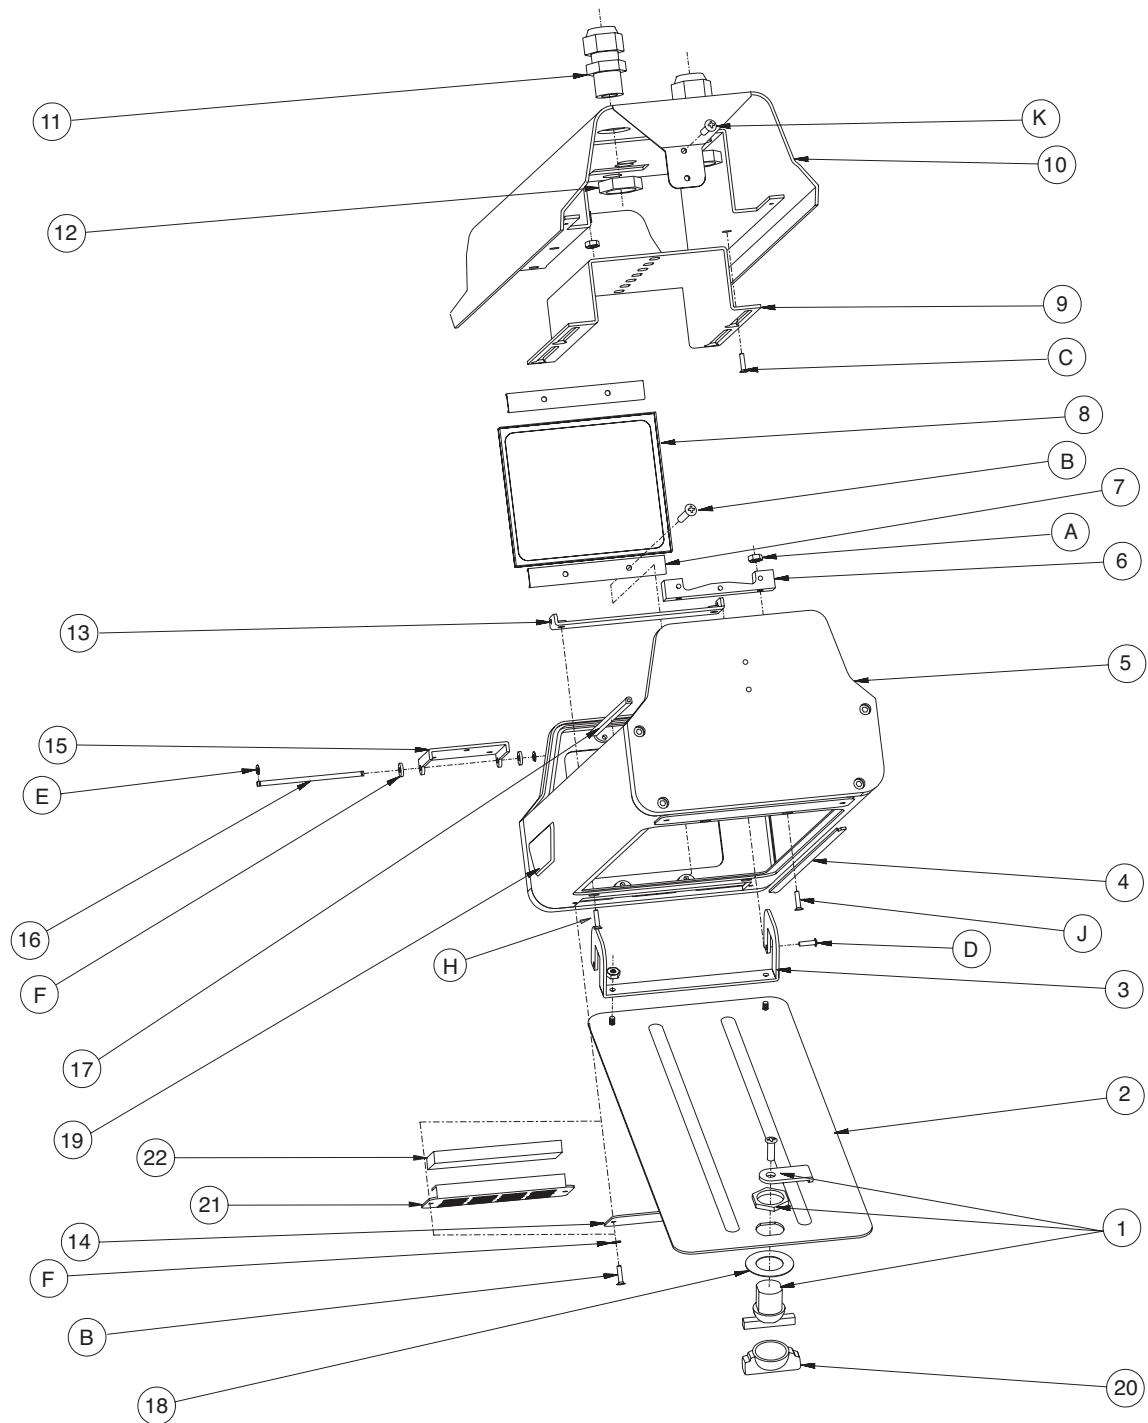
EH4712DB/EH4718DB Series Exploded Assembly Diagram
